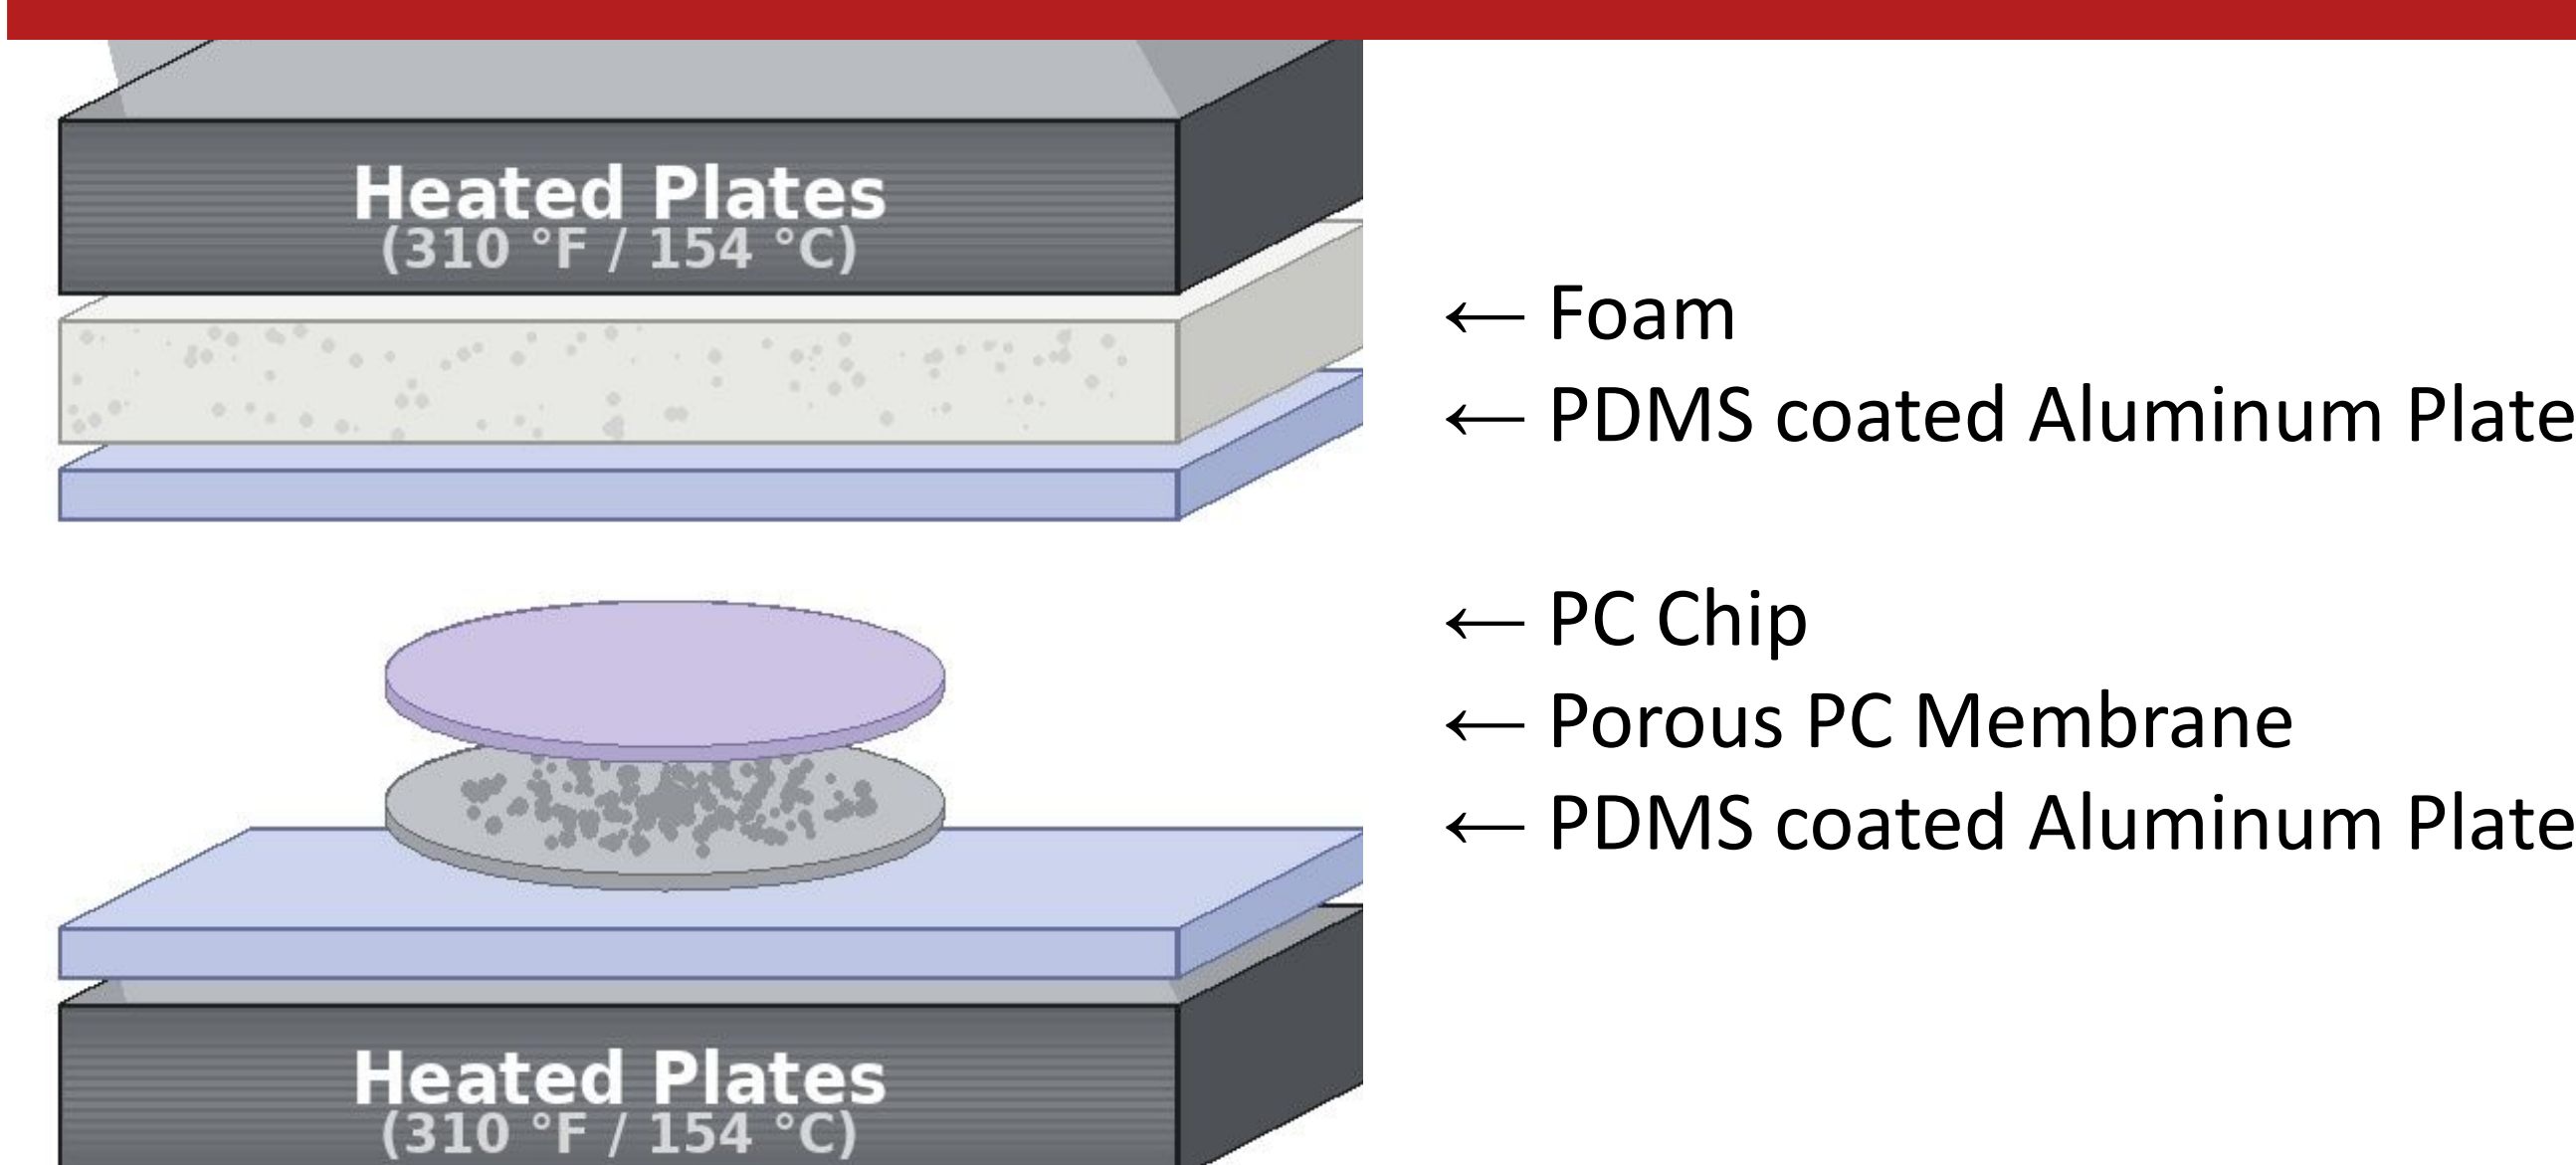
Schematic of the assembly of the apparatus used to thermally bond the membrane to the PC chip.
